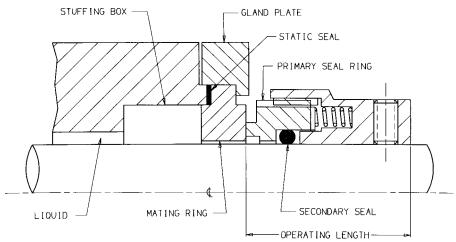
Single Seal—Outside Mounted Classification Type B Grade 1
